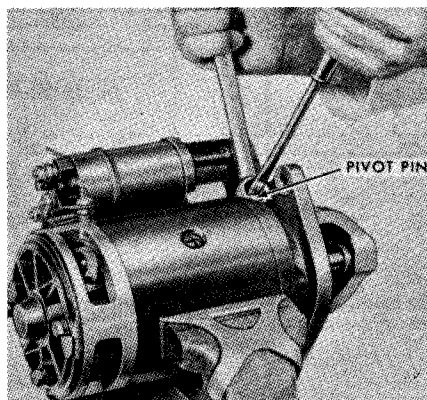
Adjusting drive pinion clearance; refer also to Fig. 133 and to text.
